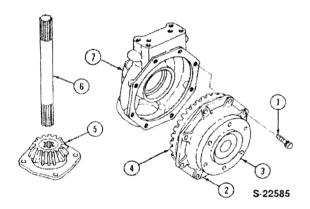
Gear Reduction Drop Box Disassembly -1320/1520 Shown
